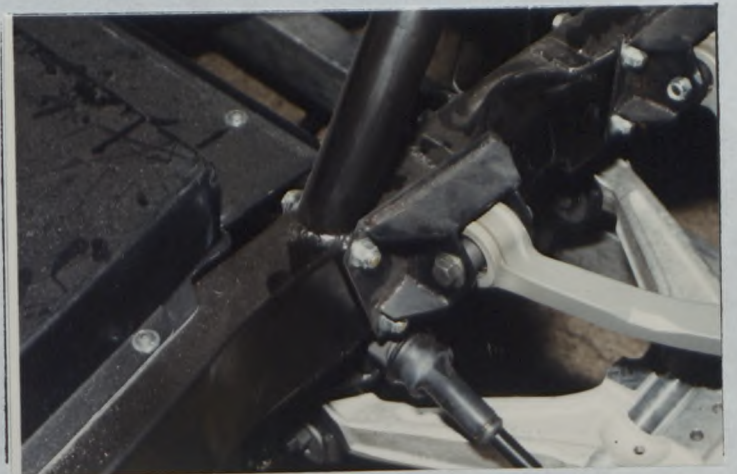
PHOTO No RIGHT BACKSTAY WELDED TO FRAME
